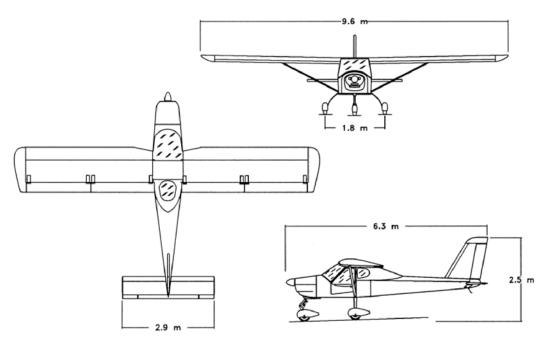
3D-view drawing of Tecnam P92J light aircraft.
